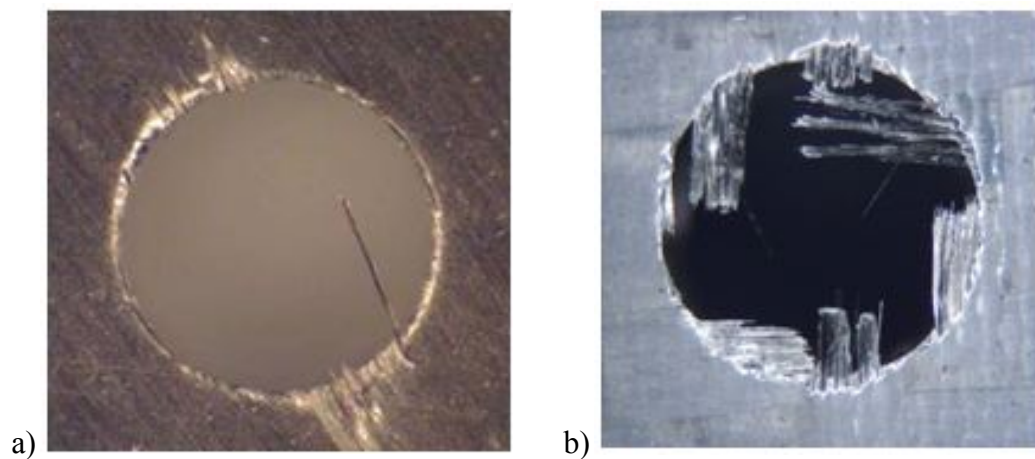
a) Delamination and b) splintering damage caused after drilling in composite panels. The photographs are courtesy of the Composite machining Blog – Sandvik AB and the Sandvik Group [78].
